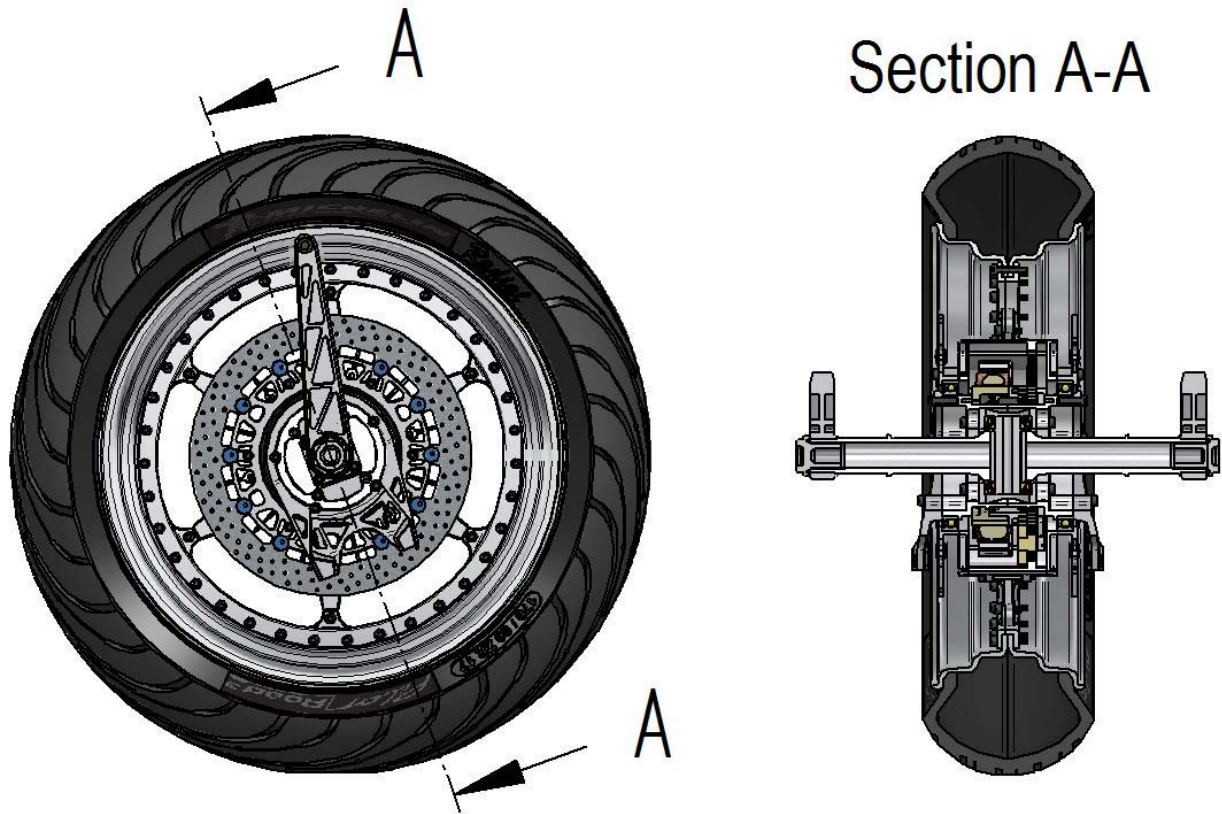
The front wheel assembled with the axle-hub, front motor and tire and rim sub-assemblies.
